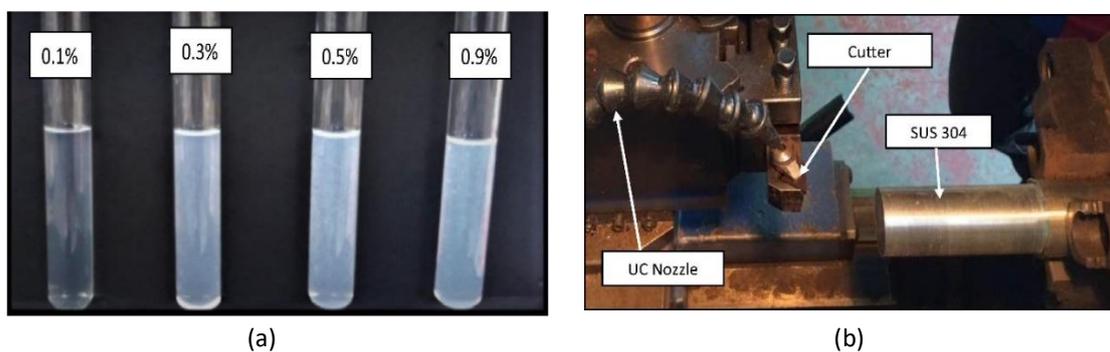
(a) Sedimentation observation, (b) Lathe machining setup [12]
